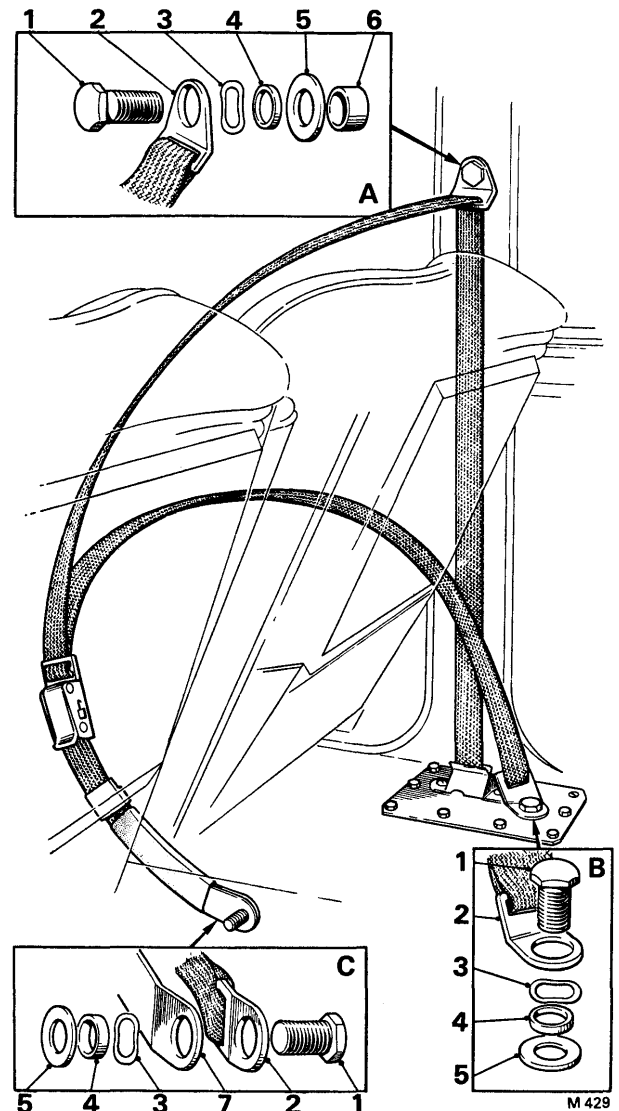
FRONT SEAT BELT MOUNTINGS—EARLY BRITAX AUTOMATIC SEAT BELT (4-Door Saloon and Long Wheelbase Non-division Cars)
